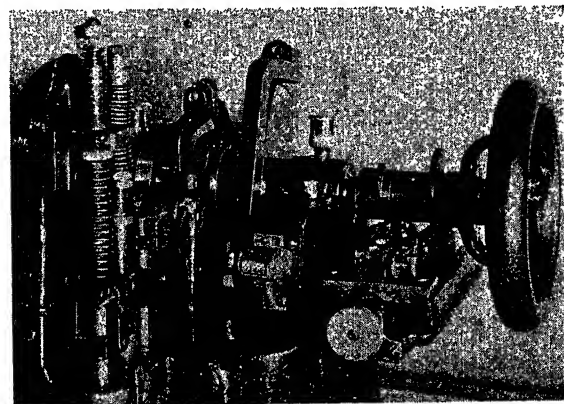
CONTACT WELDER TIMER SWITCH
